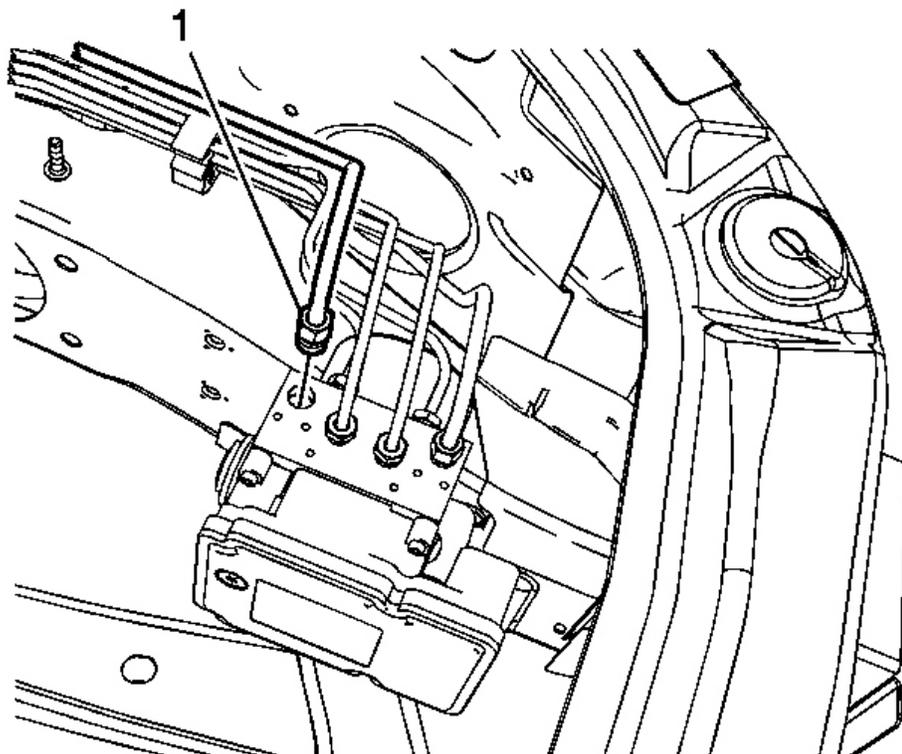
Master Cylinder Primary Brake Pipe Fitting
